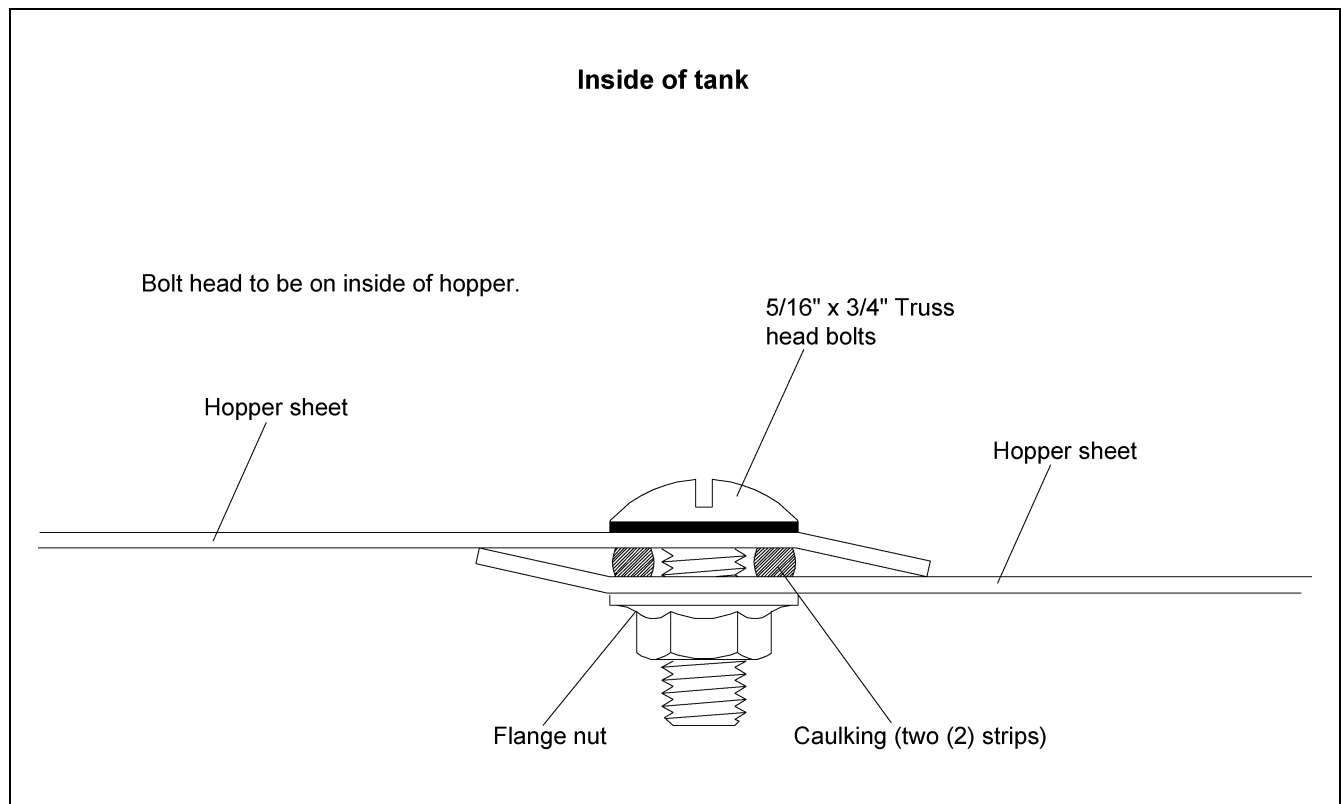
G Hopper Overlap and Bolt Detail for Tanks w/out Reinforcement Angle
